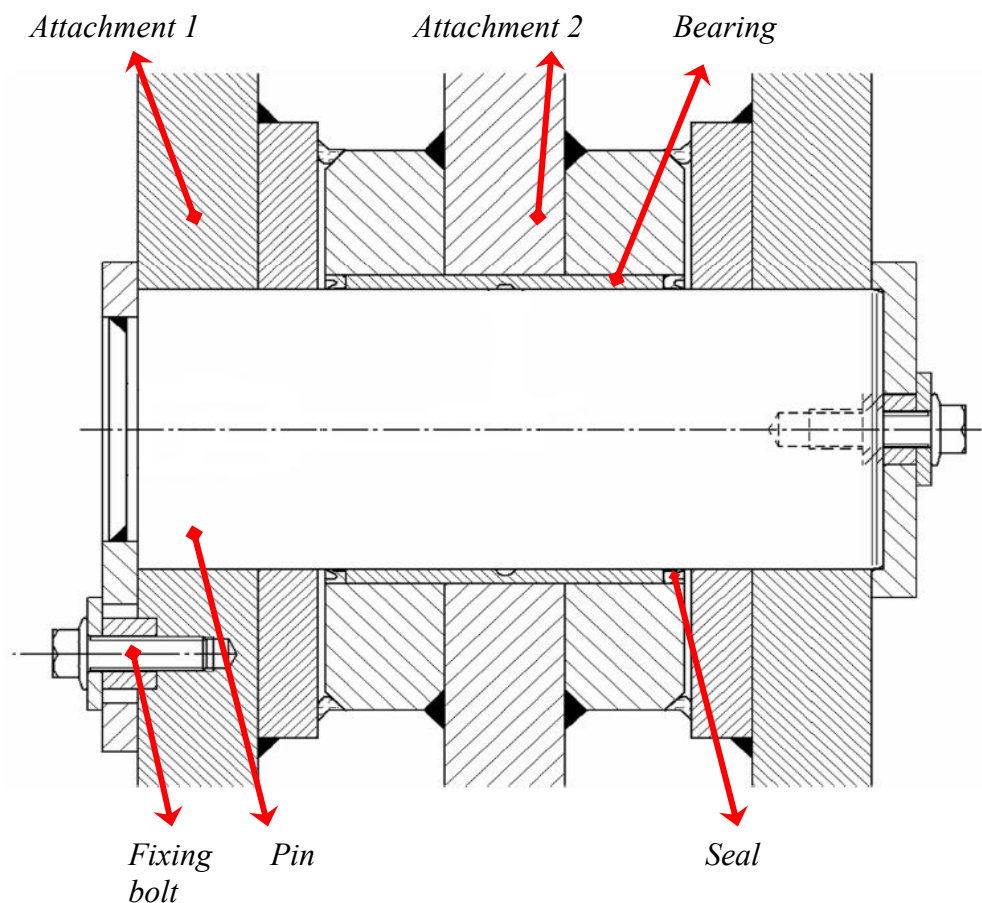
Cross-section of a typical journal bearing mounting [2]
